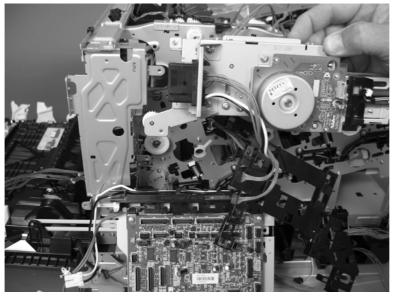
Remove the fuser drive assembly (5 of 6)
